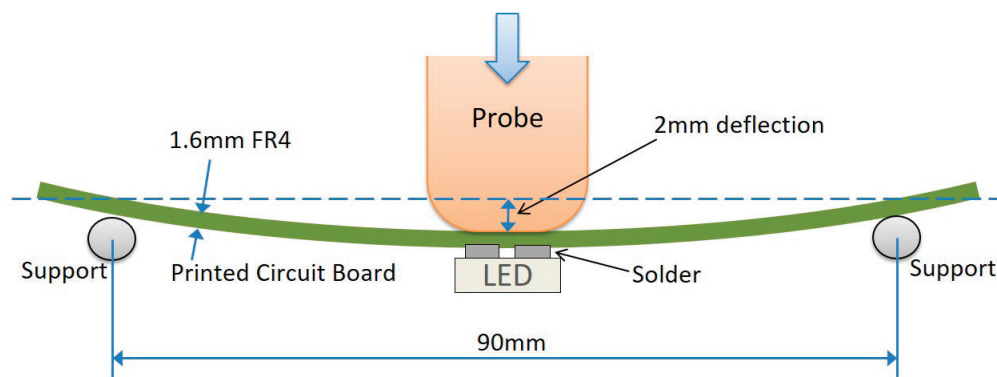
Maximum PCB bending guideline to prevent damage to the LUXEON Altilon Intense package.
